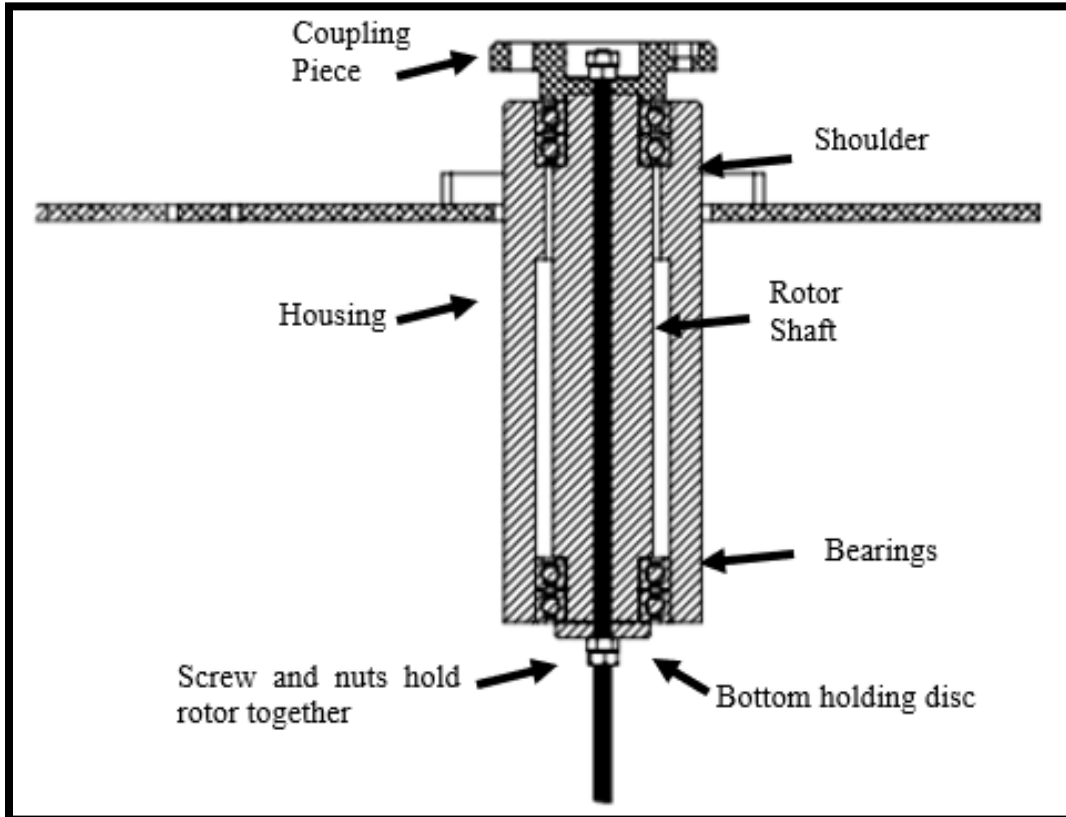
Cross-Sectional View of Bearing Housing Assembly.
